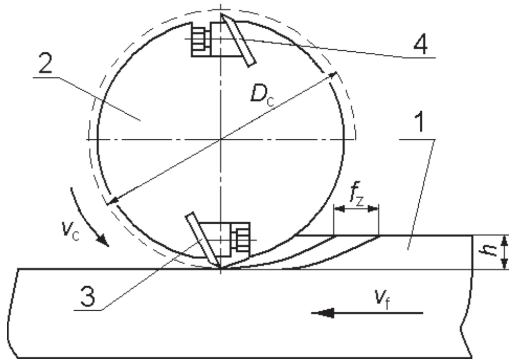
Scheme of longitudinal milling: 1 specimen, 2 cutterhead, 3 examined cutting tool, 4 balance tool, D_c cutting diameter (103 mm), v_c direction of cutting speed, v_f direction of feed rate, f_z feed per insert, h cutting depth (2 mm)
